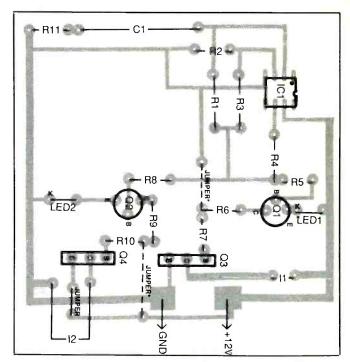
This is the wiring diagram for the pc board illustrated in Fig. 2. Jumpers identified by dashed lines install on the board only if the incandescent-lamp option is not used.
